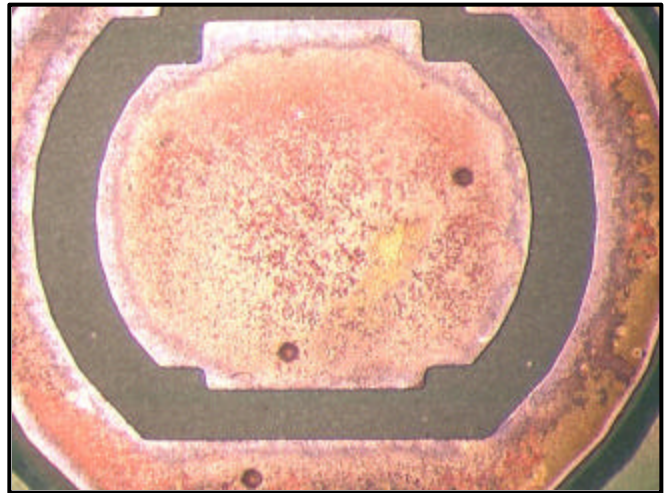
Macroscopic view of the immersion Ag surface exposed to mixed gas flow for 96 hours showing the tarnish and corrosion product.
